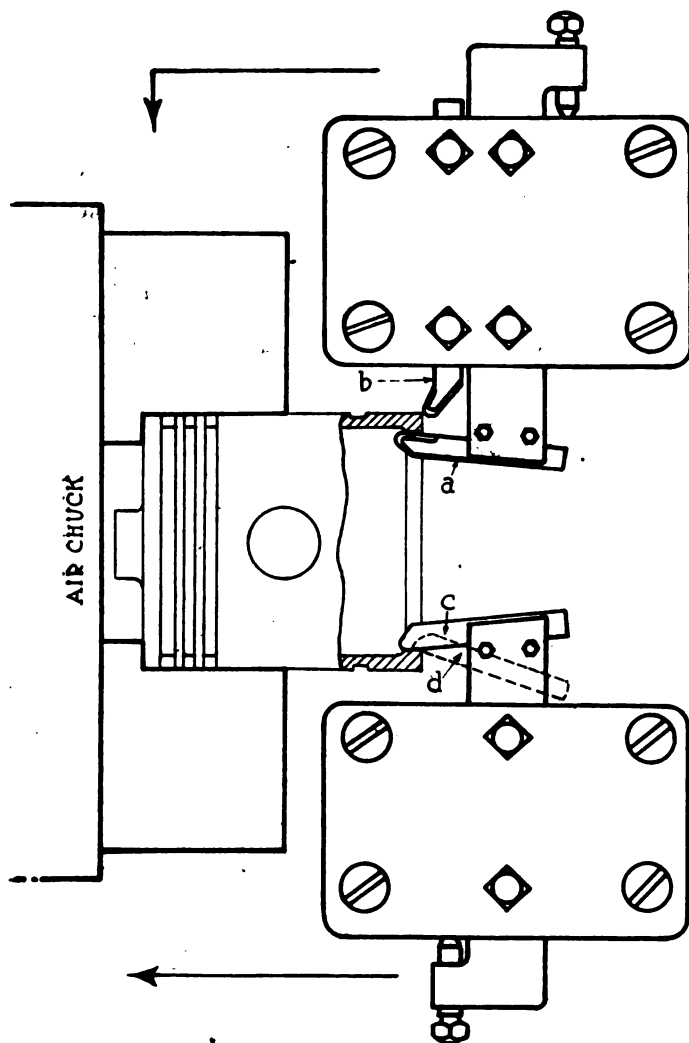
Jones & Lamson method of finishing skirt end of piston
